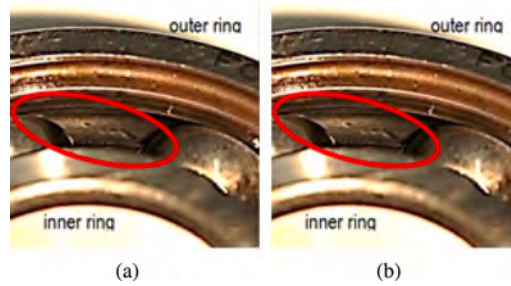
Fault pictures of the bearings. (a) outer ring. (b) inner ring.
